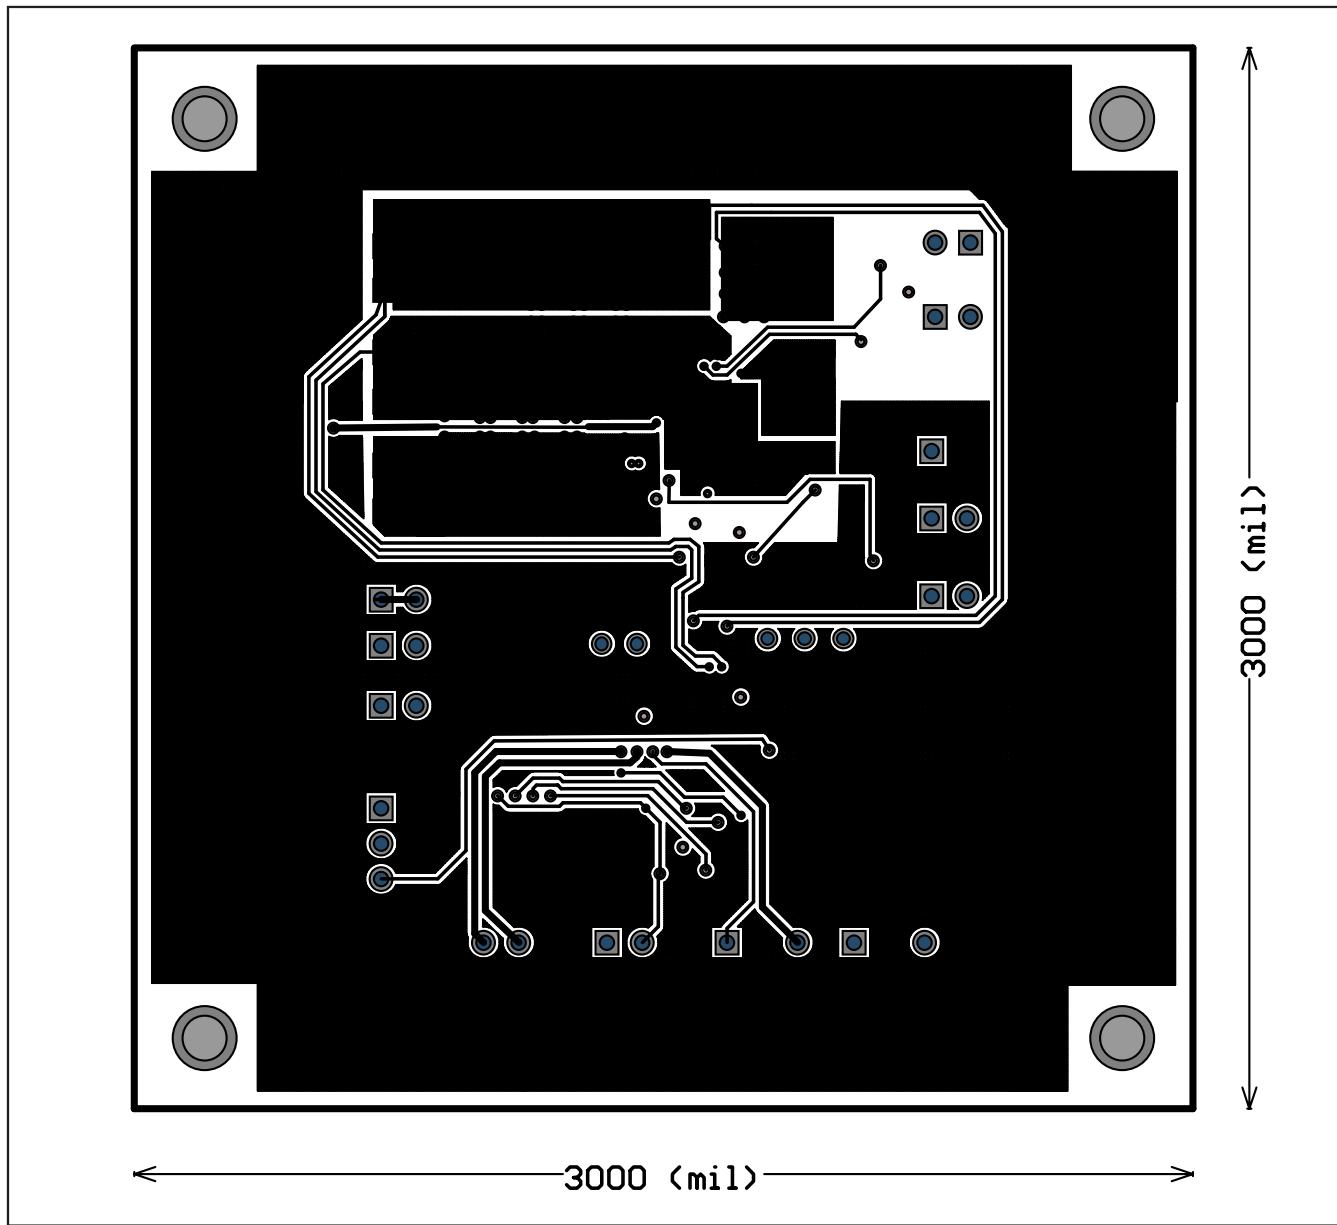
MAX8654 EV Kit PCB Layout—Inner Layer 1
